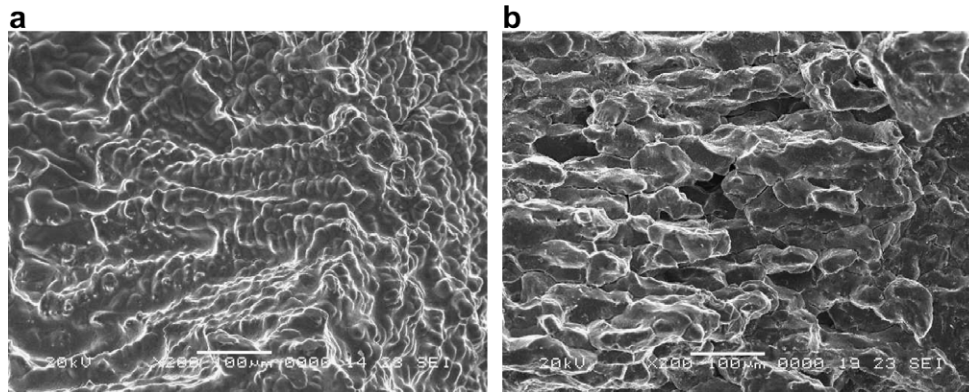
Fracture features of PMZ cracks of AA6061 alloy welds made with (a) AA5356 filler (b) AA5356 + 0.5%Sc filler.
